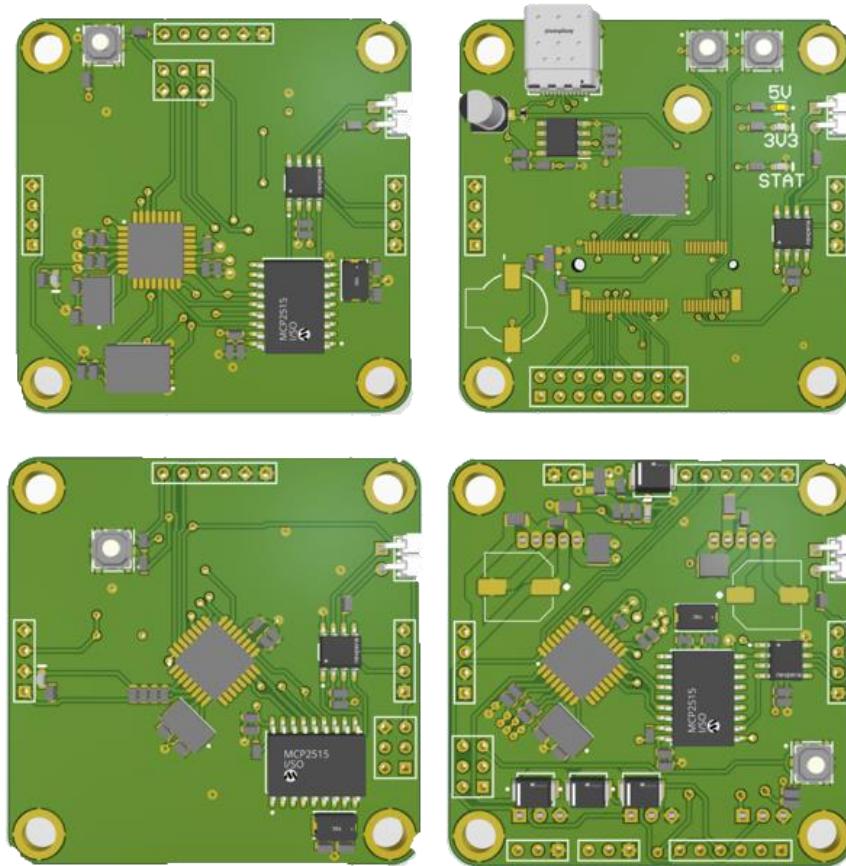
The four avionics boards in altium (Top left- Telemetry Board, Top right – Controller Board, Bottom left – Sensor Board, Bottom right- Power Board).
